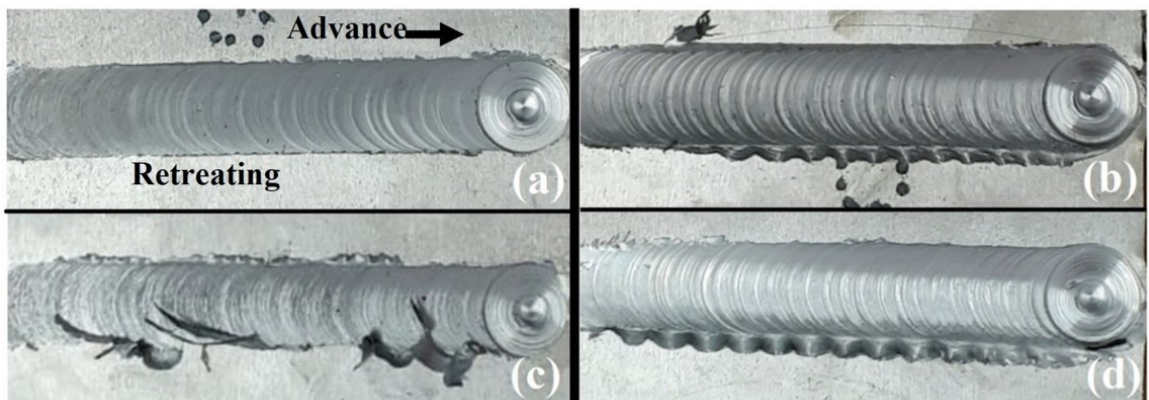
Visual appearance of the welds obtained by FSW: (a) welded joint 1, (b) welded joint 2, (c) welded joint 3, and (d) welded joint 4.
